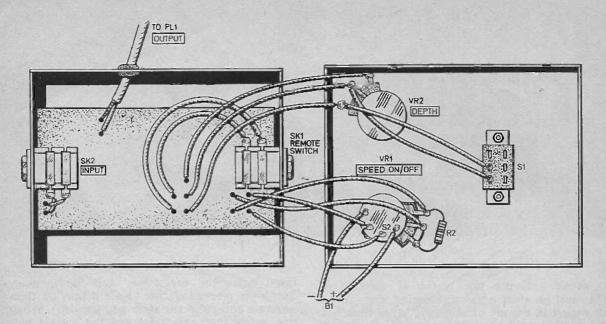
Connection and wiring of the circuit board to the remaining components.
